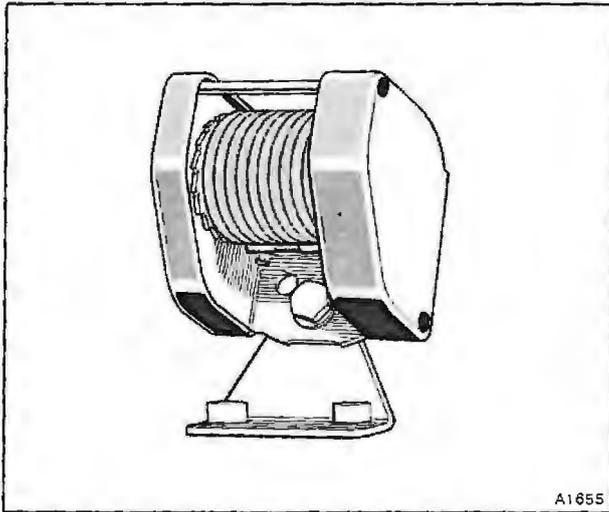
Front seat belt reel to sill mounting arrangement
